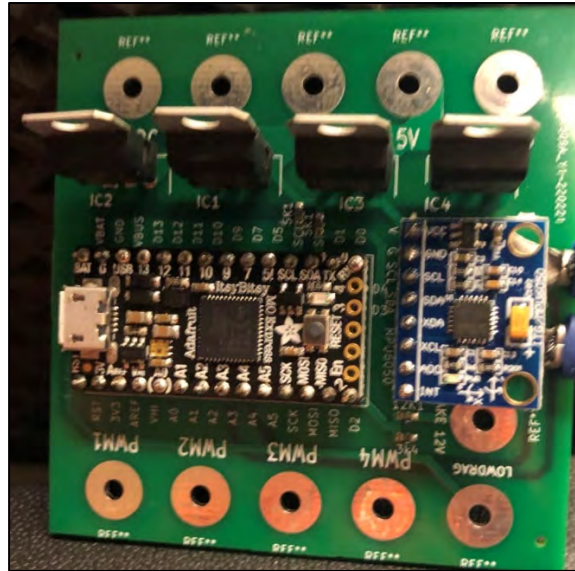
Completed PCB with Itsybitsy, MPU-6050, and two ring terminals
